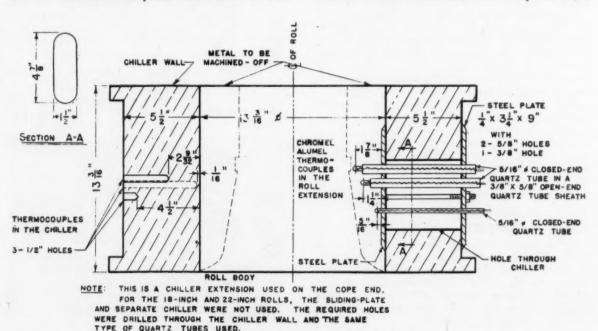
Sketch illustrating thermocouple arrangement used in the 12-in. roll casting.
